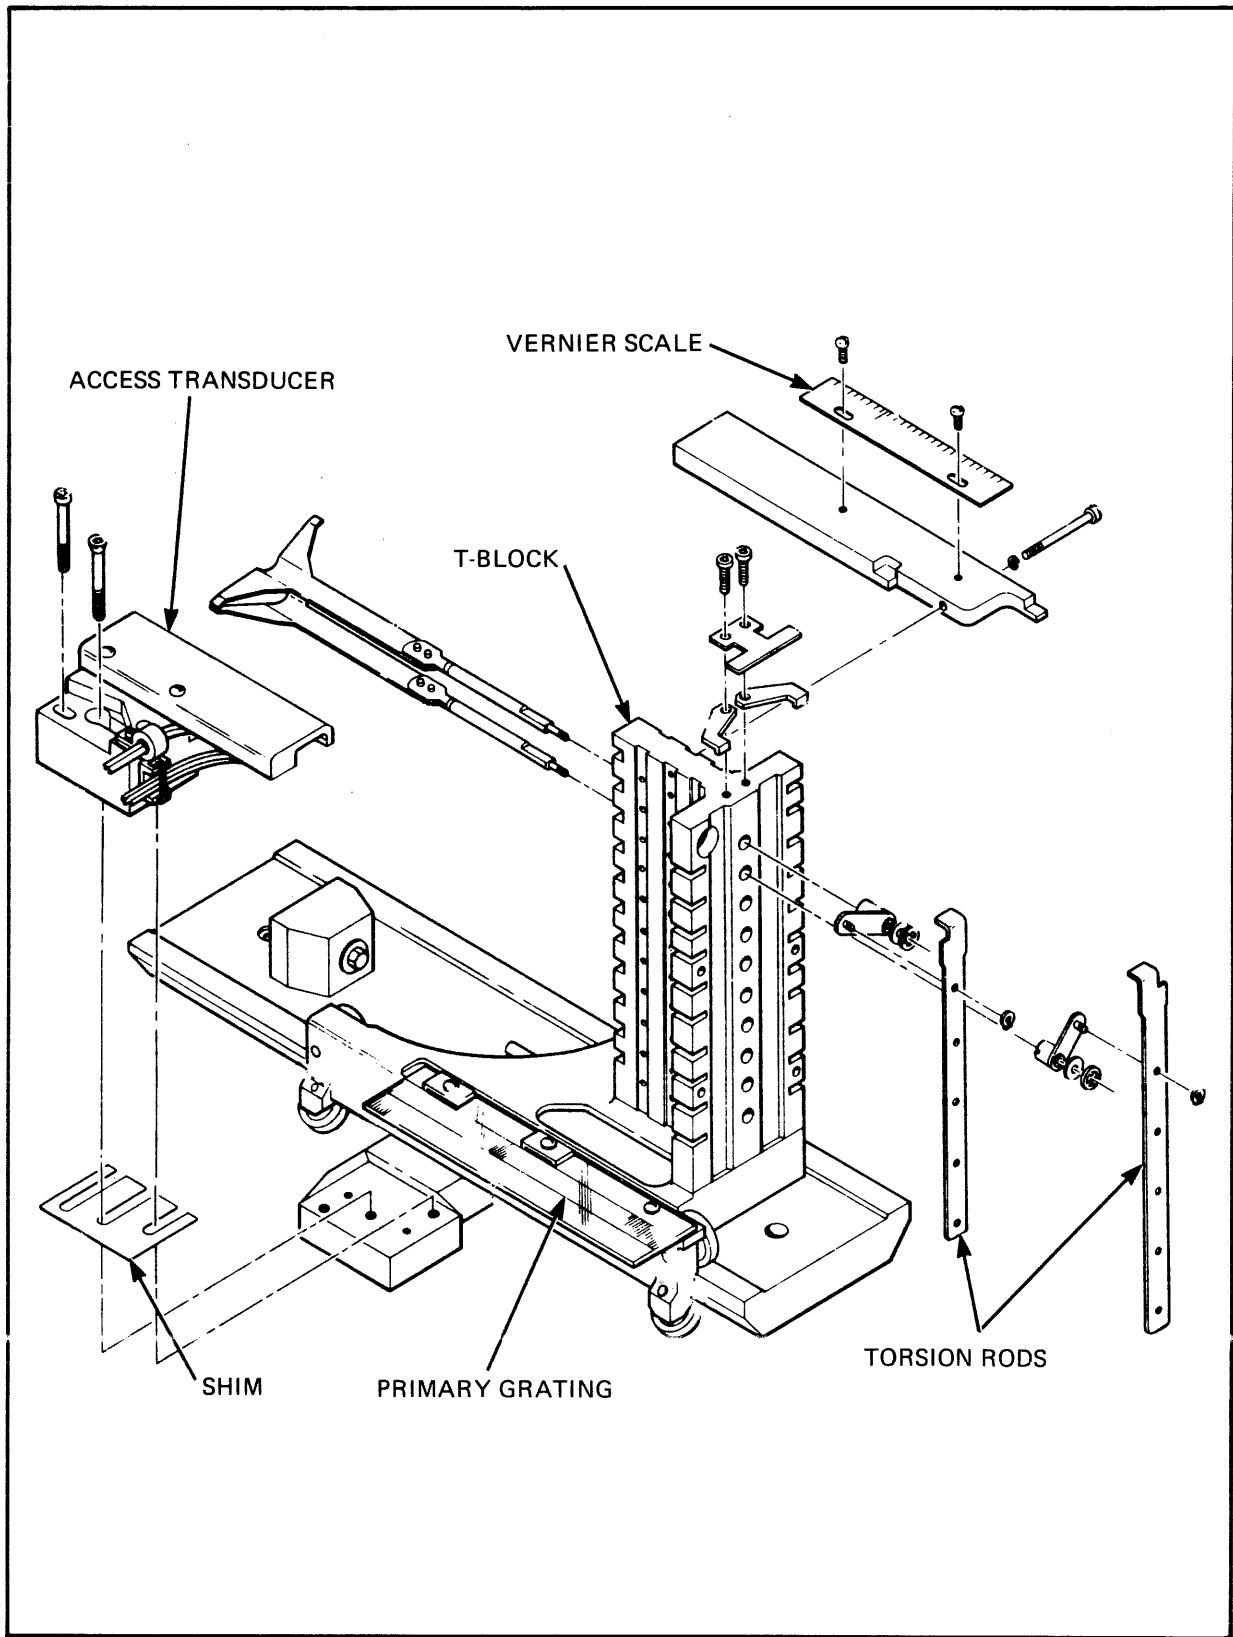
Carriage Assembly, Parts Breakdown Diagram
